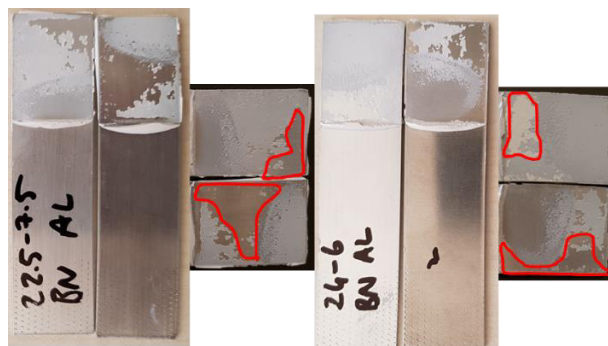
Fracture Surfaces of Synergetic Mixtures
